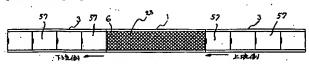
It is a left side view of the cover plate of drawing 93.
